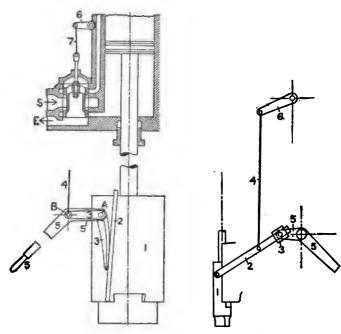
Valve-gear of Bement and Miles Steam-hammer.
